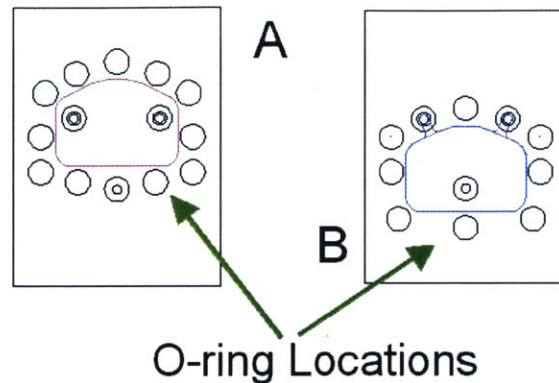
O-ring Packaging Placement for Both Device Configurations
